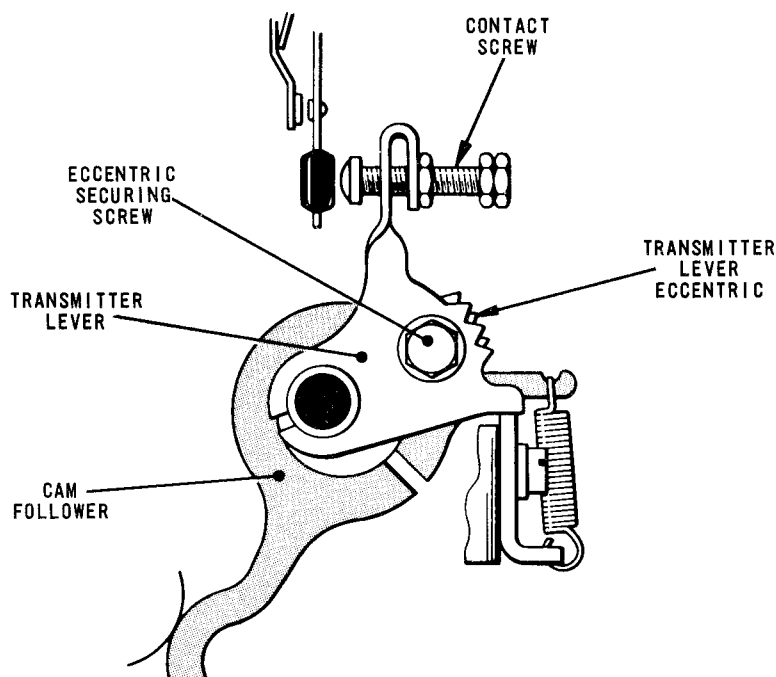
TRANSMITTER LEVER/CAM ASSEMBLY
